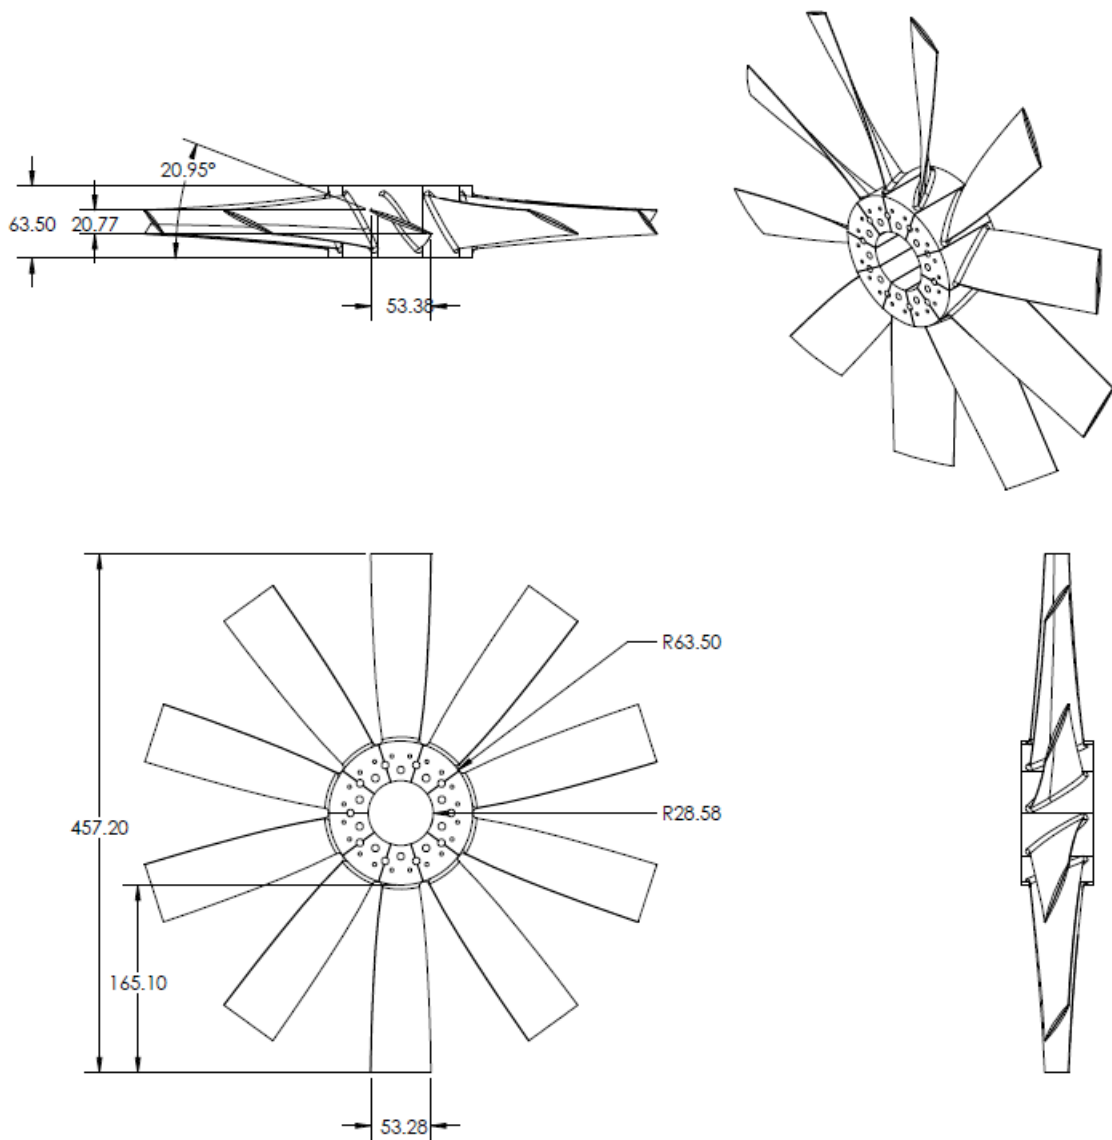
Three view and isometric drawings of the 2.25 scaled Sevik rotor used in this experiment.
